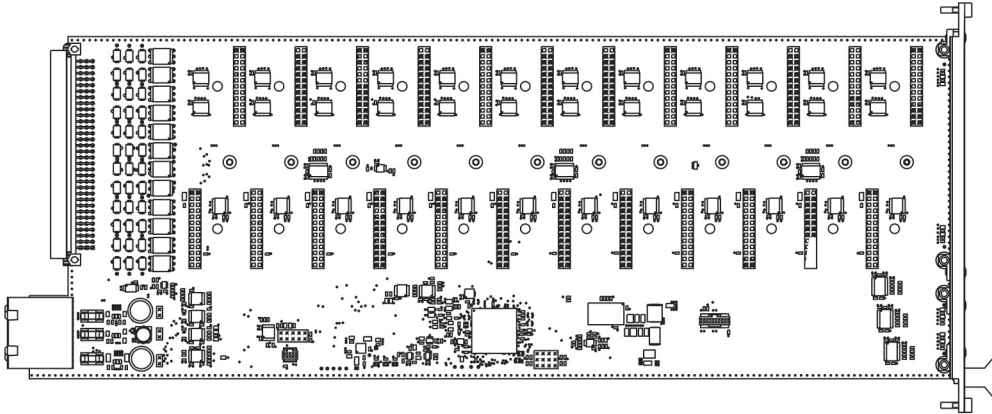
View of the ES5385.1 Carrier Board for Resistor Cascade (Unassembled) from the Side
